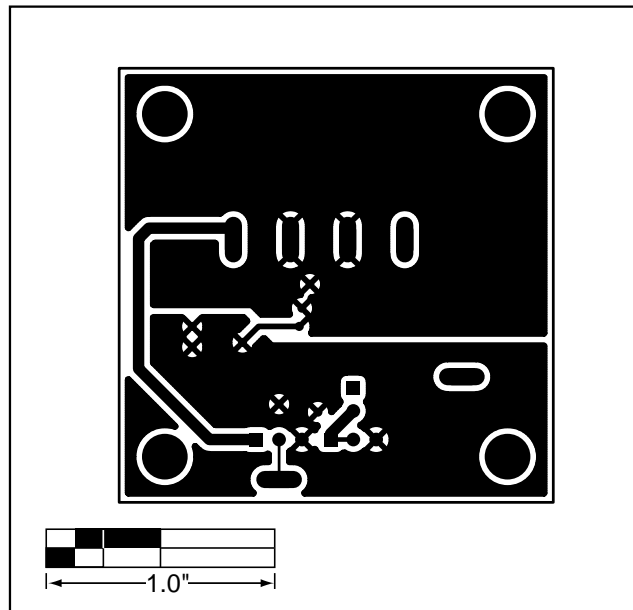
MAX1692 EV Kit PC Board Layout—Solder Side
